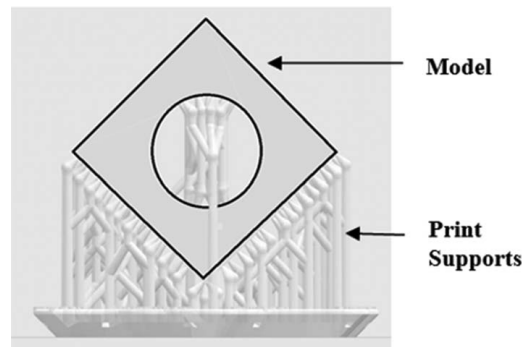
Slicer model of the test sample in a 45-deg orientation with print supports. The cube face edges are bolded in black to outline the geometry
